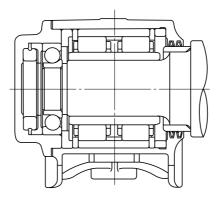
Axle Box with an Angular Contact Ball Bearing and Buffer to Sustain Axial Load
